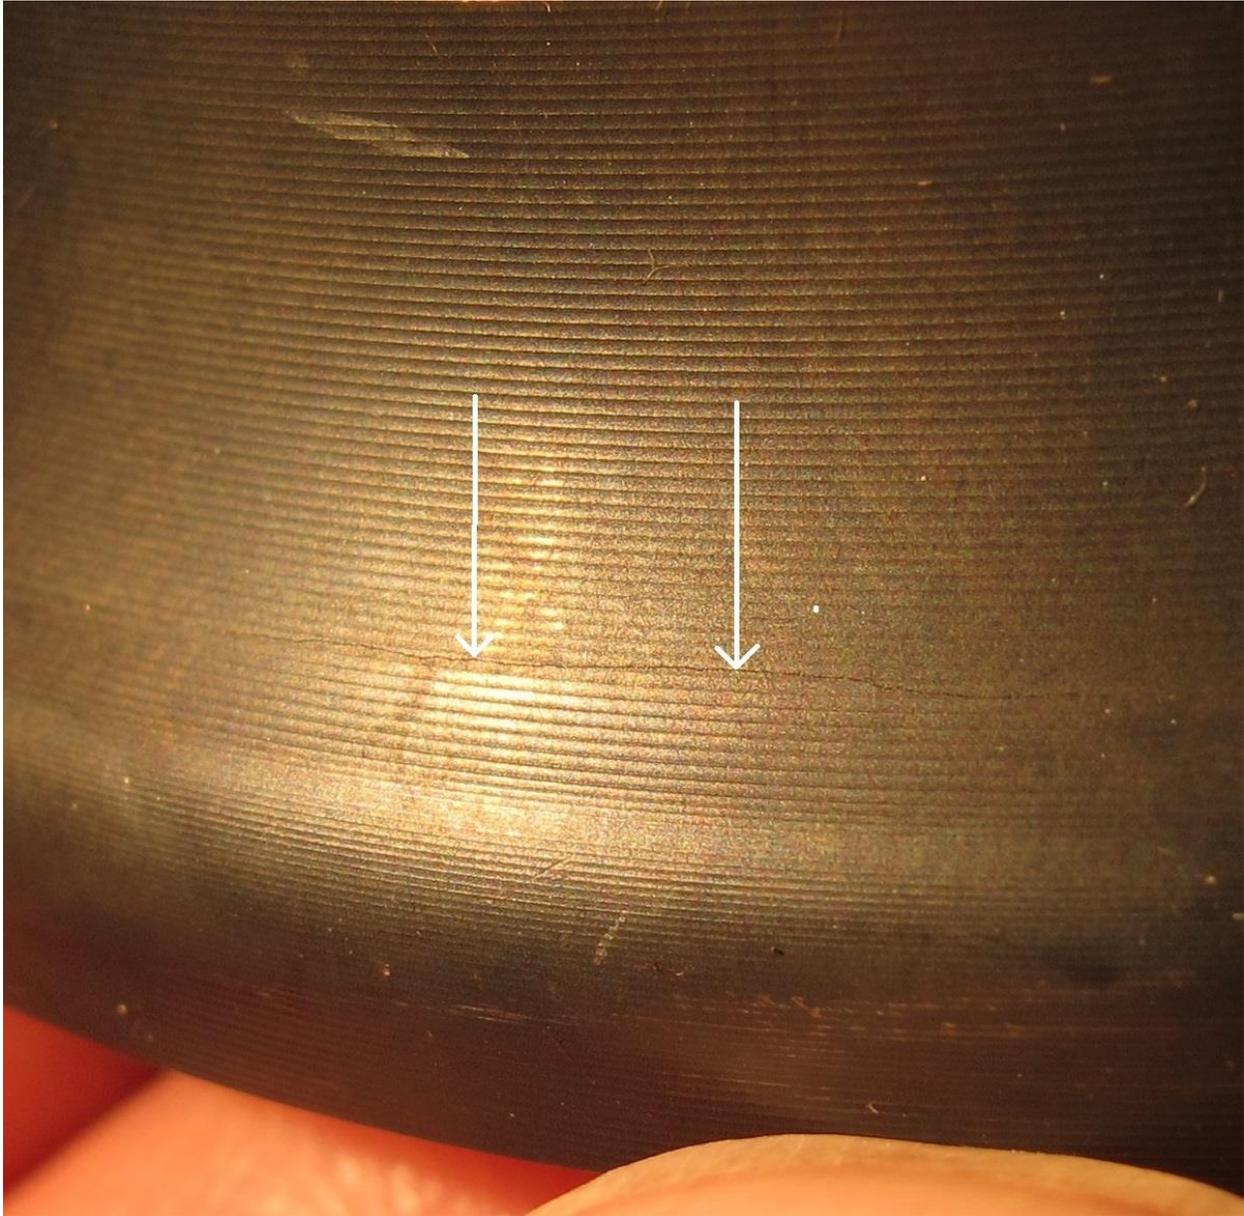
This is a higher magnification view of the circumferential crack that formed in the 52100 bearing ring during quenching.
